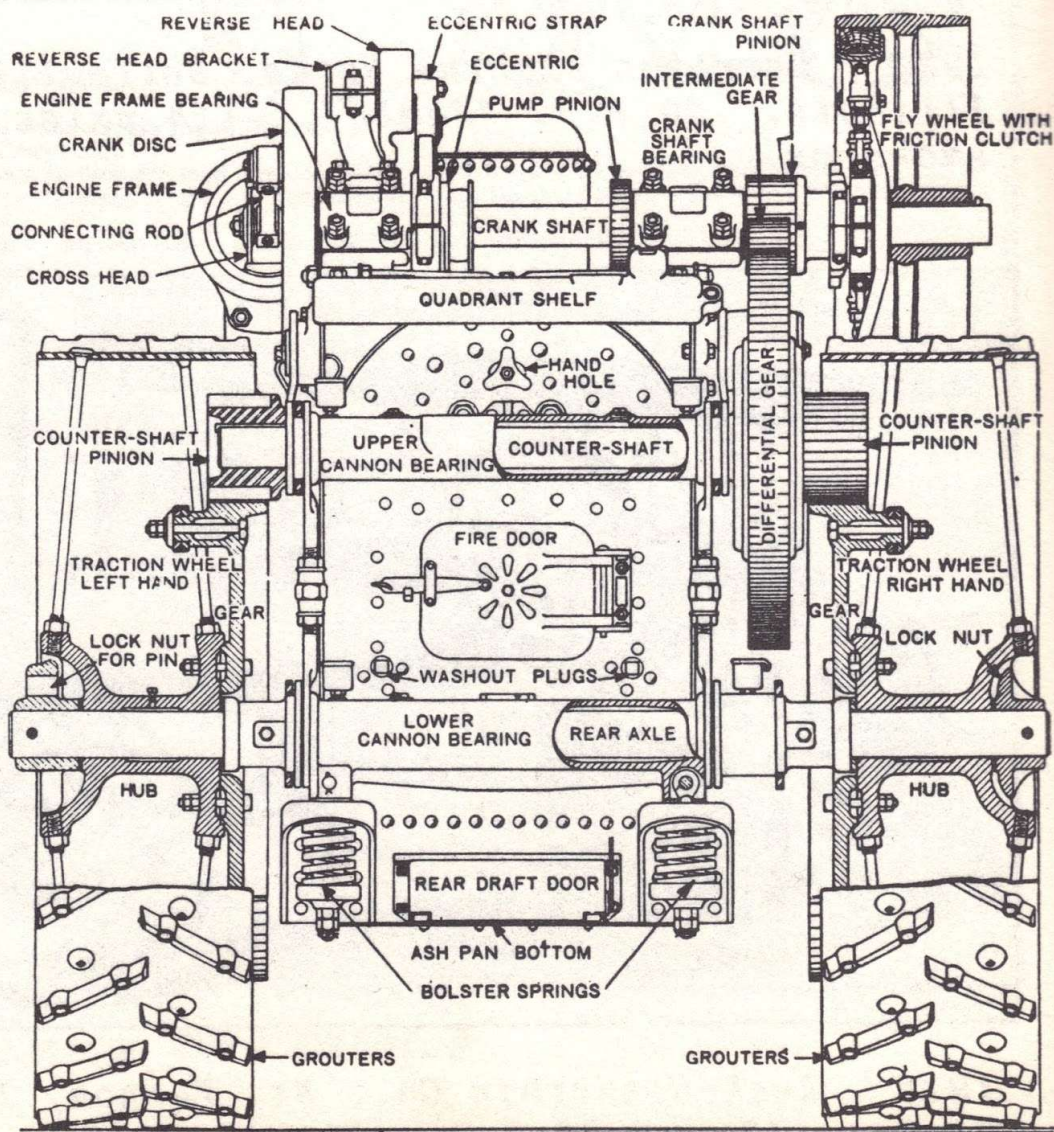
CUT SHOWING CANNON BEARINGS AND GEARING
